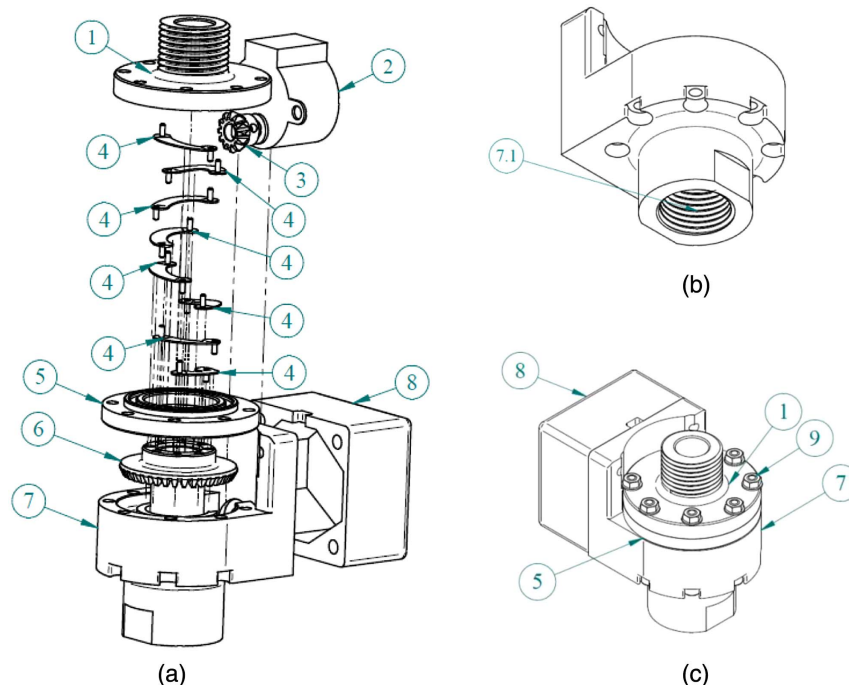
(a) Detailed view of the improved prototype; (b) new structure component; and (c) assembly. 1 = blade holder; 2 = microstepper motor; 3 = motion/driving gear; 4 = blades; 5 = central body; 6 = driving gear; 7 = structure; 8 = microstepper motor protection; 9 = screws; and 10 = sealing rings.
